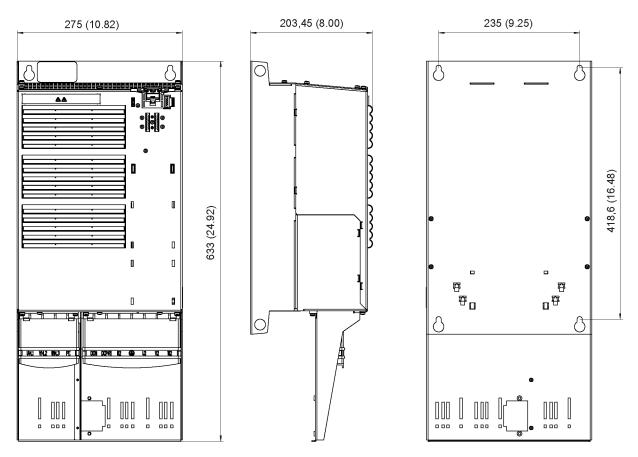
Dimension drawing, PM340 Power Module with screening kit, frame size FSD with integrated line filter, dimensions in mm (inches)
